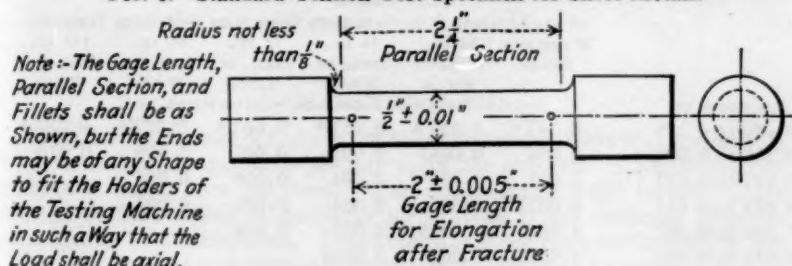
Standard 2-in. Gage Length Tension Test Specimen.
